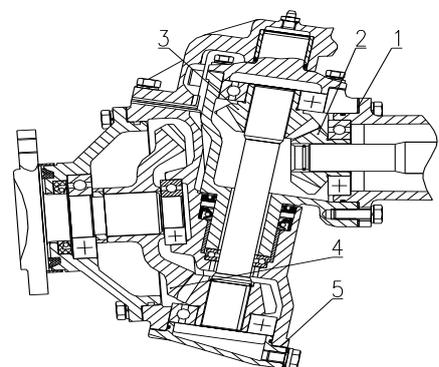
Adjustment of Side Transmission of Front Drive Axle
